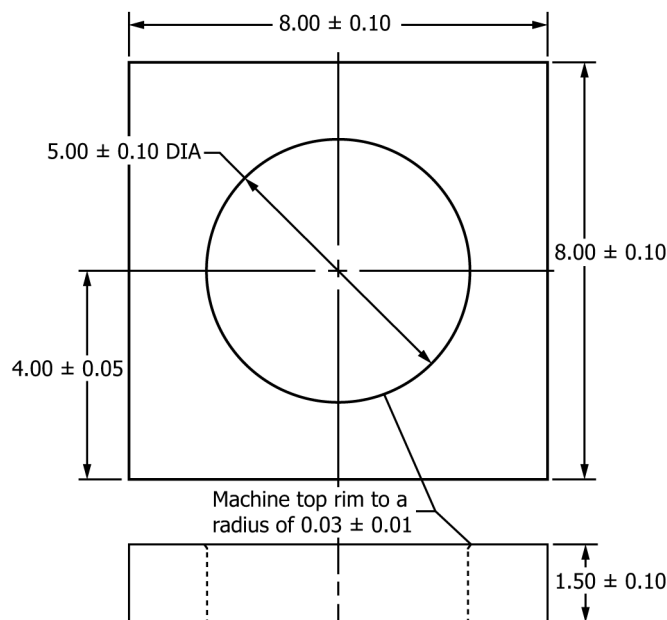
Typical Fixture with Open Hole (Inch-Pound Version)
